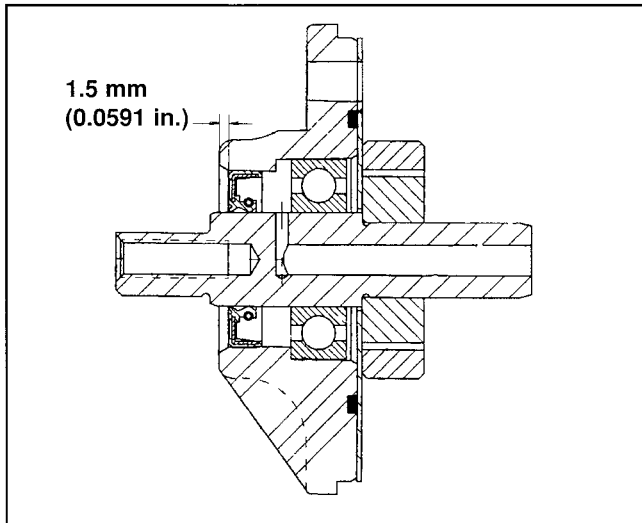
Cross-Sectioned View of Oil Pump Showing Oil Seal Depth.
